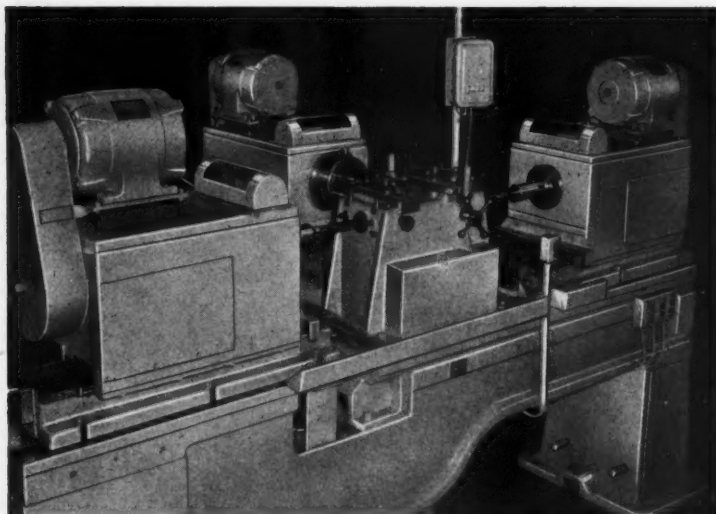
Incorporating a bed from a disused lathe, this special 3-way machine rough-drills the two crankshaft bores, and drills three tapping-size holes in the column mounting face
